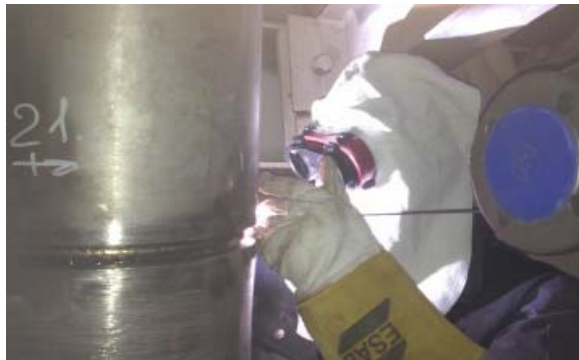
, 10, 11: Installation and welding in of Pre-fabricated spools
